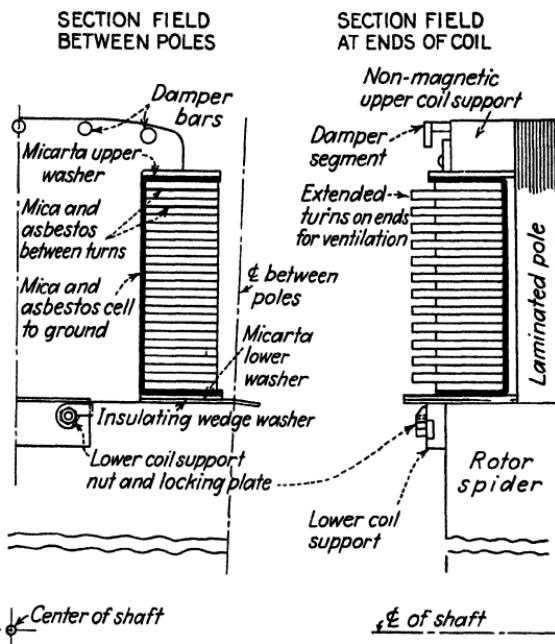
Section of field coil with ventilated turns. (*Courtesy of Westinghouse Electric & Manufacturing Co*)
